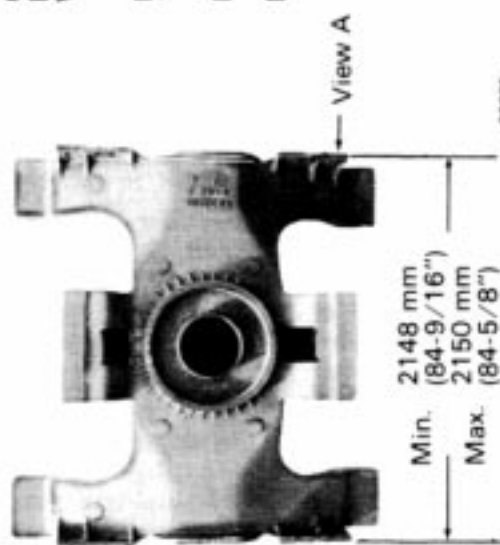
Four Wheel Swing Hanger Frame And Bolster Wear Plates
